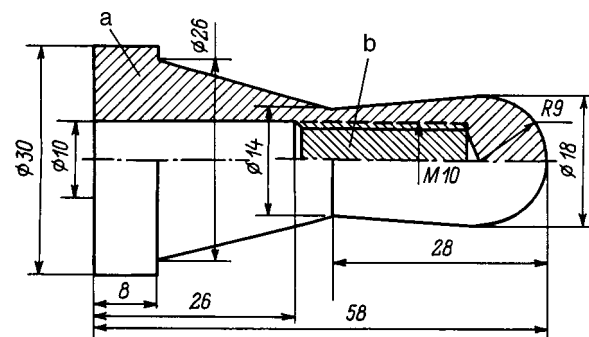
Sketch of the construction of an explosion-propelled projectile with head diameter half the base diameter: a — body of a composite material, b — brass insert.
